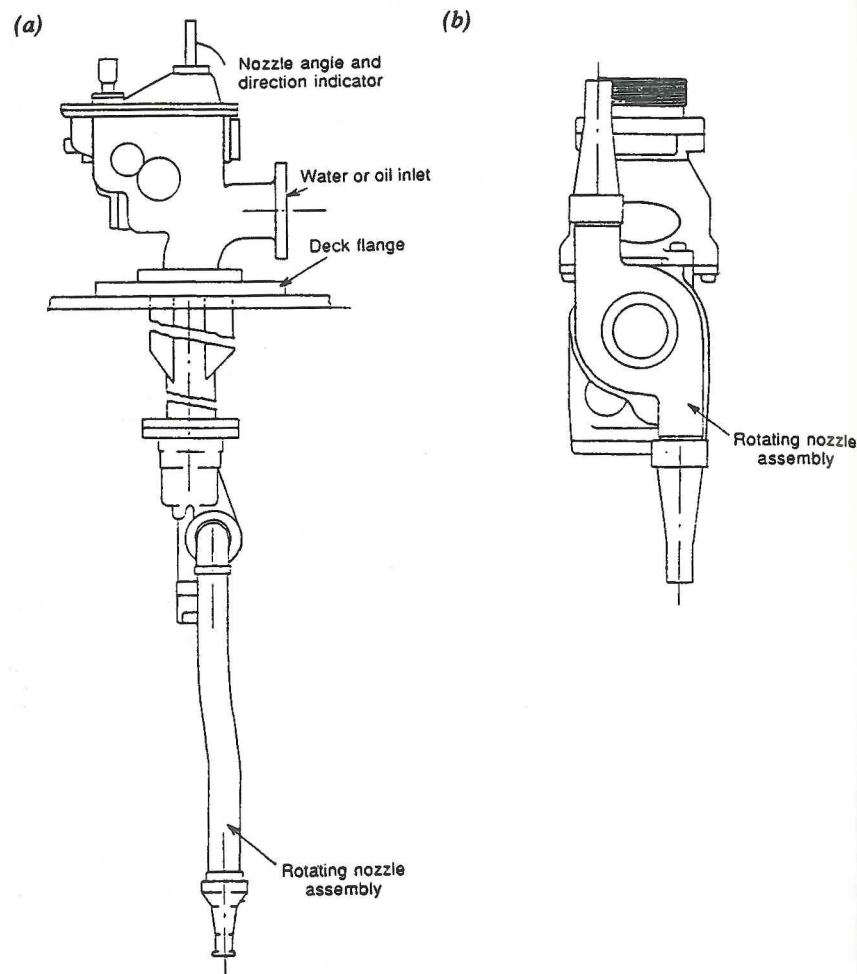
Tank cleaning machines: (a) fixed tank washing machine; (b) portable tank washing machine
